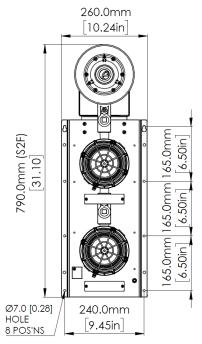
Mounting Detail and Dimensions for D1x Alarm Bar
